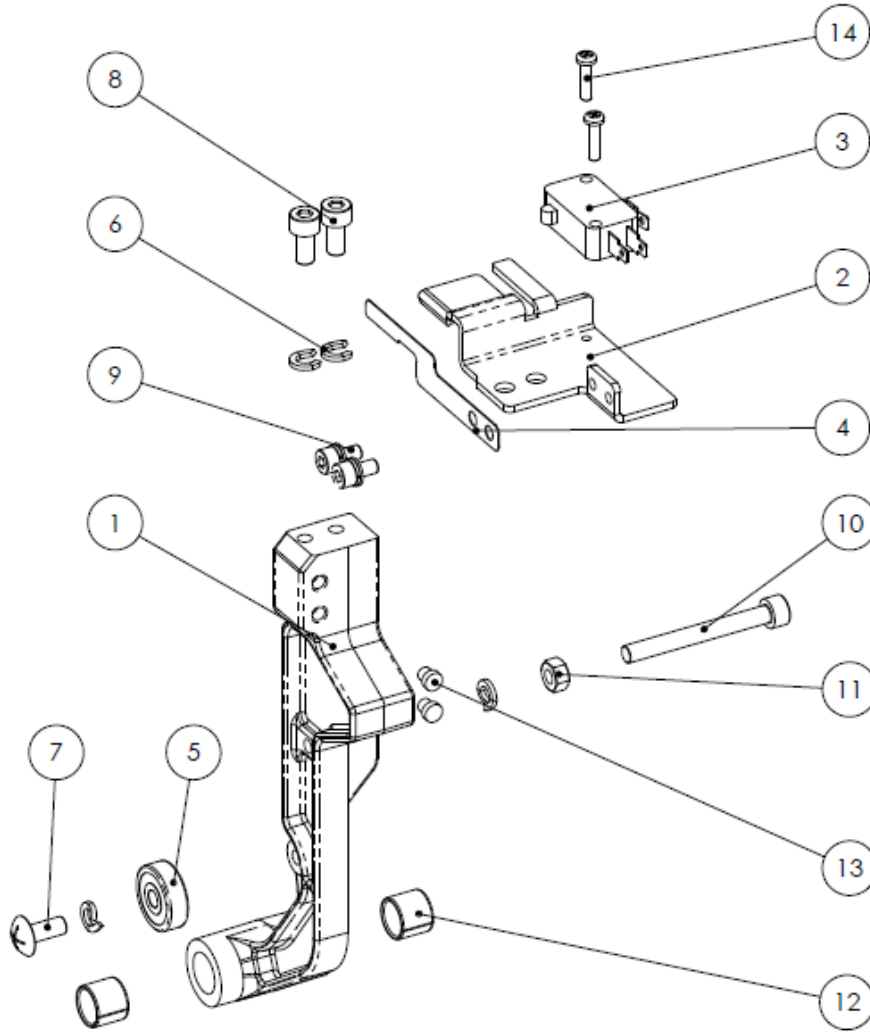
POSITION CAM UNITFIGURE 6-1 POSITION CAM UNIT
